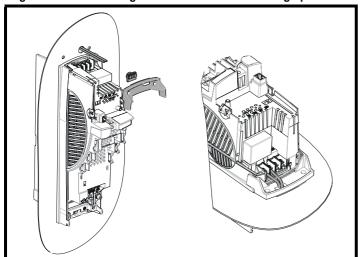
Fitting the heatsink mounted braking resistor on size 1
